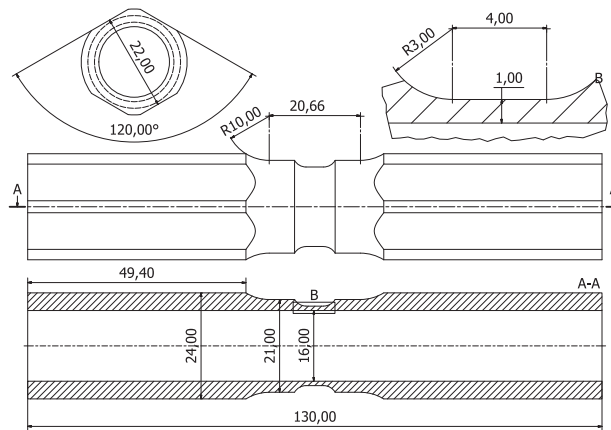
Tension–torsion specimen geometry (dimensions in mm).
